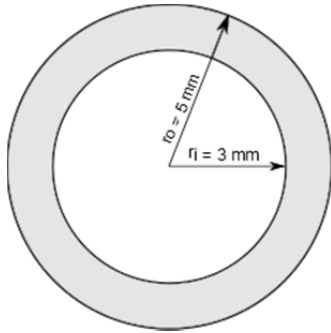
Dimensions of aluminium tube used to make the metal rack
